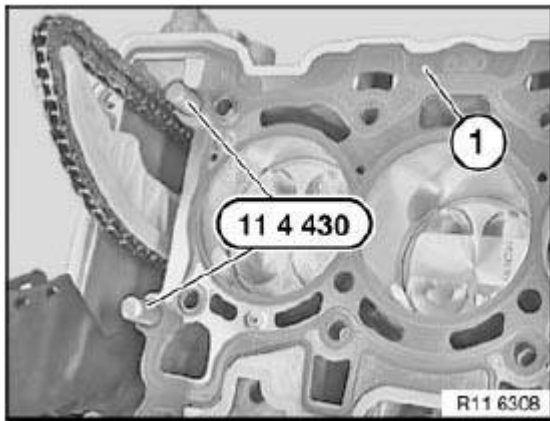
Inserting Special Tool 11 4 430 Into Bore Holes
